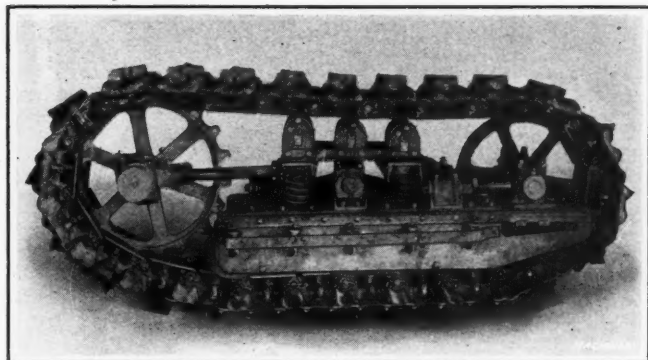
Track Assembly of 75-horsepower Holt Caterpillar Tractor
